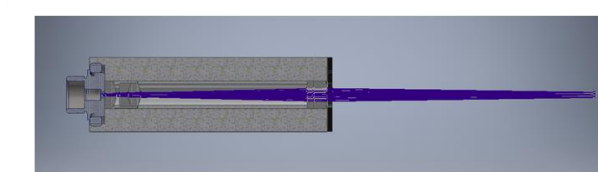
Cutaway of the nested barrel mechanical design, given the optical design parameters.
